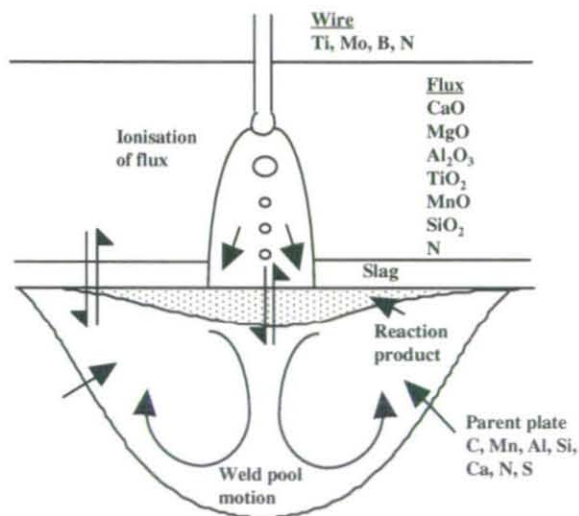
Submerged arc welding process dynamics in the weld pool.
